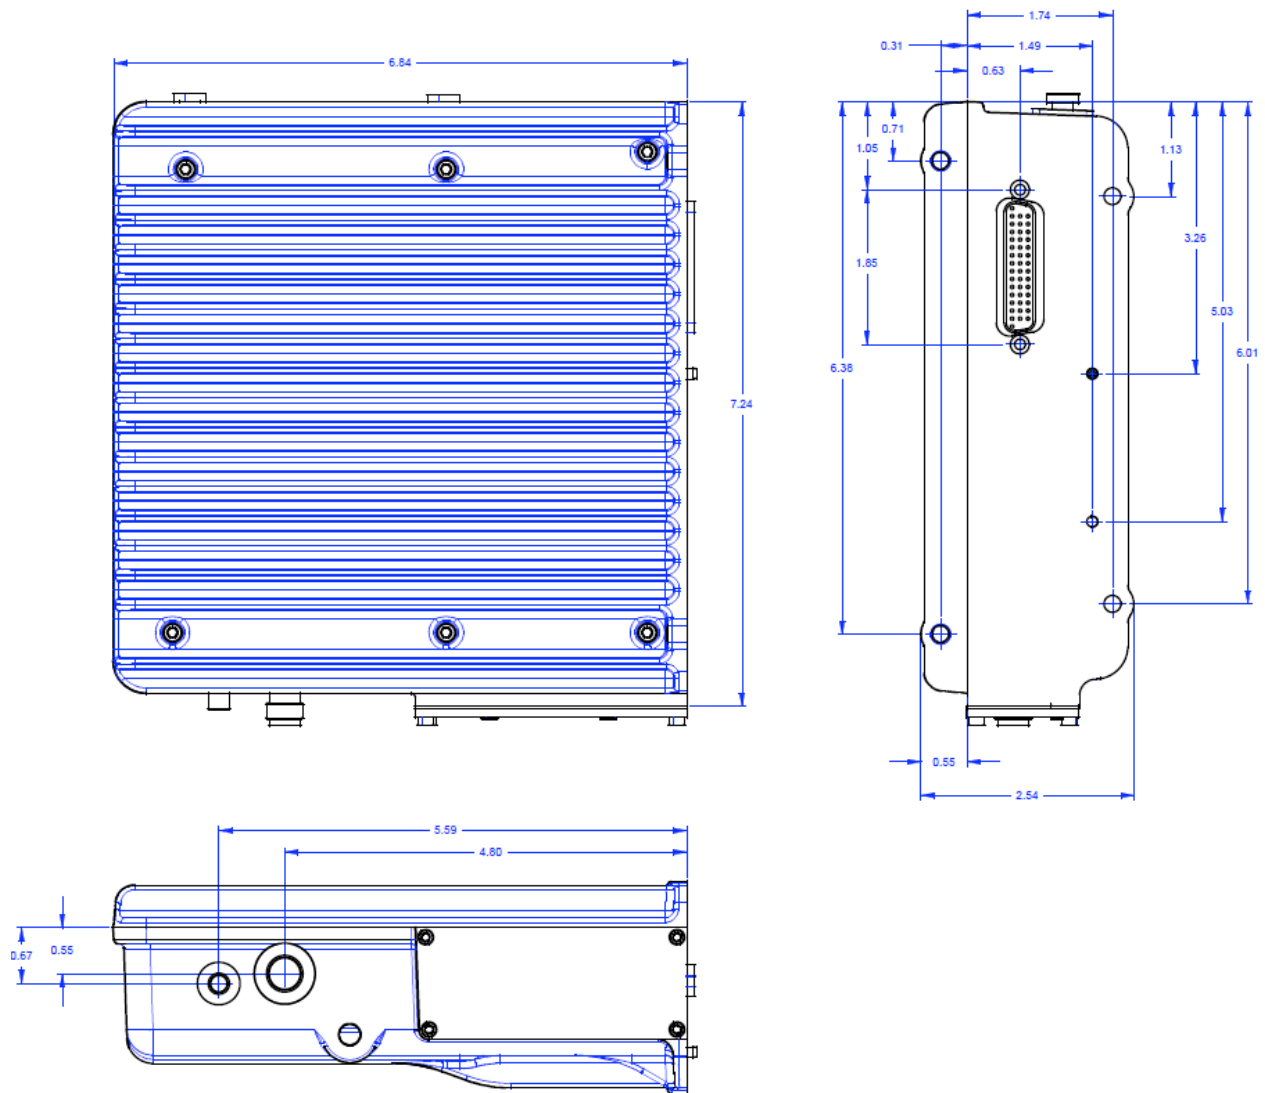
P25 VRS Outline Drawing (dims in inches, not to scale)
